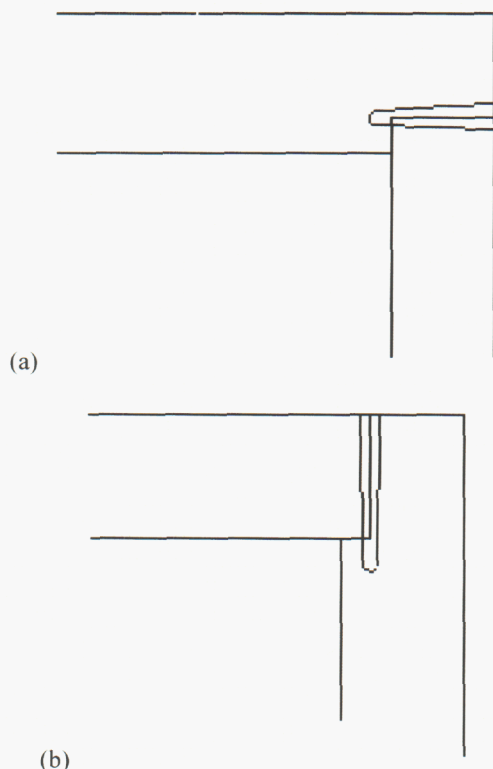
Detail of proposed RPEB lid weld preparation: (a) Horizontal-Vertical position and (b) down-hand position
